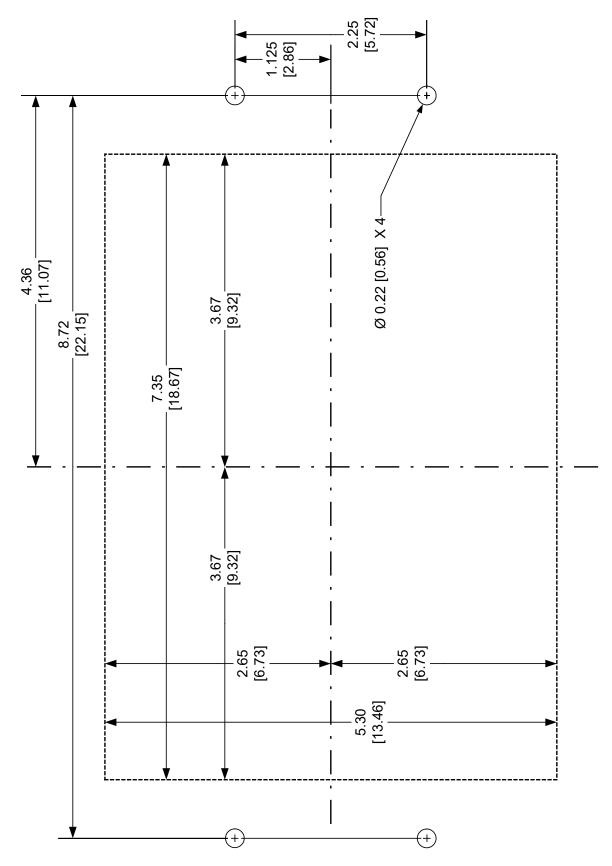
M-7679 Horizontal Panel Cutout Dimensions
